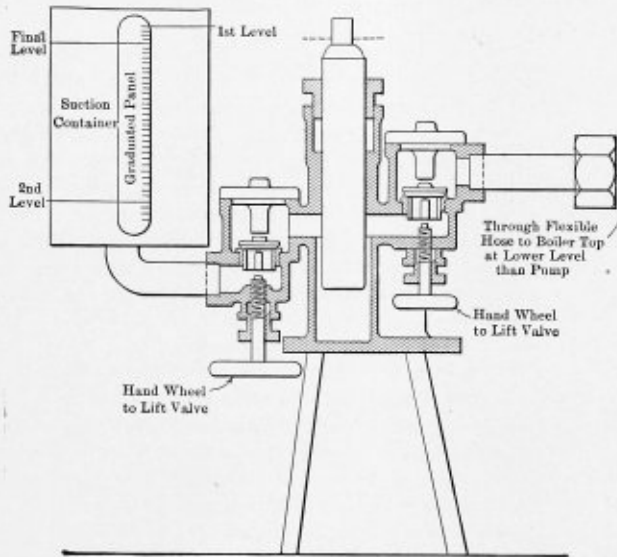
DIAGRAMMATIC SKETCH OF PORTABLE BOILER TEST APPARATUS
